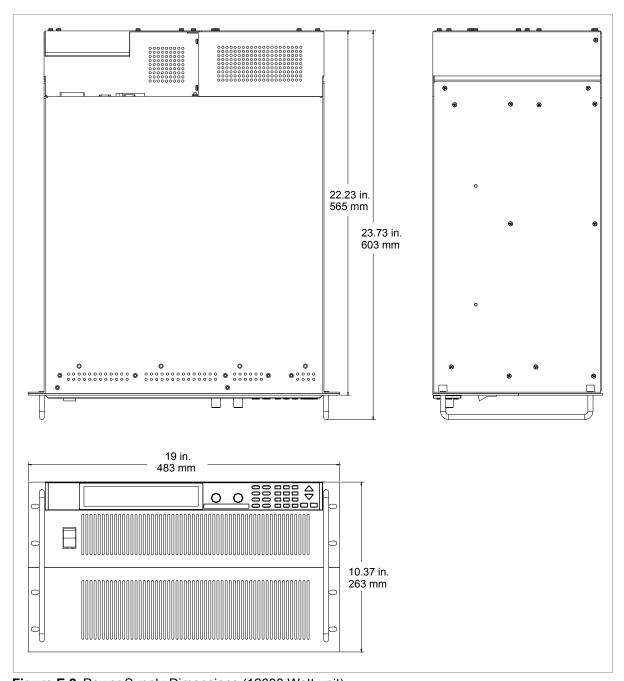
Power Supply Dimensions (12000 Watt unit)
